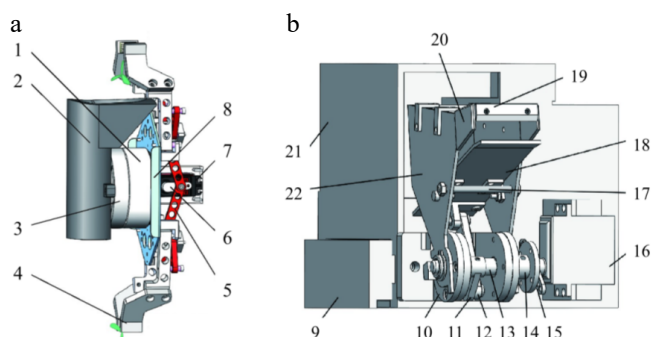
Intelligent picking end-effector of premium tea. 1. Motor. 2. Temporary storage box. 3. Connecting piece. 4. Picking fingers. 5. Transmission connecting rod. 6. Steering gear arm. 7. Steering gear. 8. Mounting plate. 9. Collection drawer. 10. Stop block. 11. Crank. 12. Connecting rod. 13. Step shaft. 14. Flange. 15. Steering gear arm. 16. Steering gear. 17. Gear lever. 18. Jaw. 19. Customized blade. 20. Blade seat. 21. Leak proof fixing box. 22. Tool rest.
